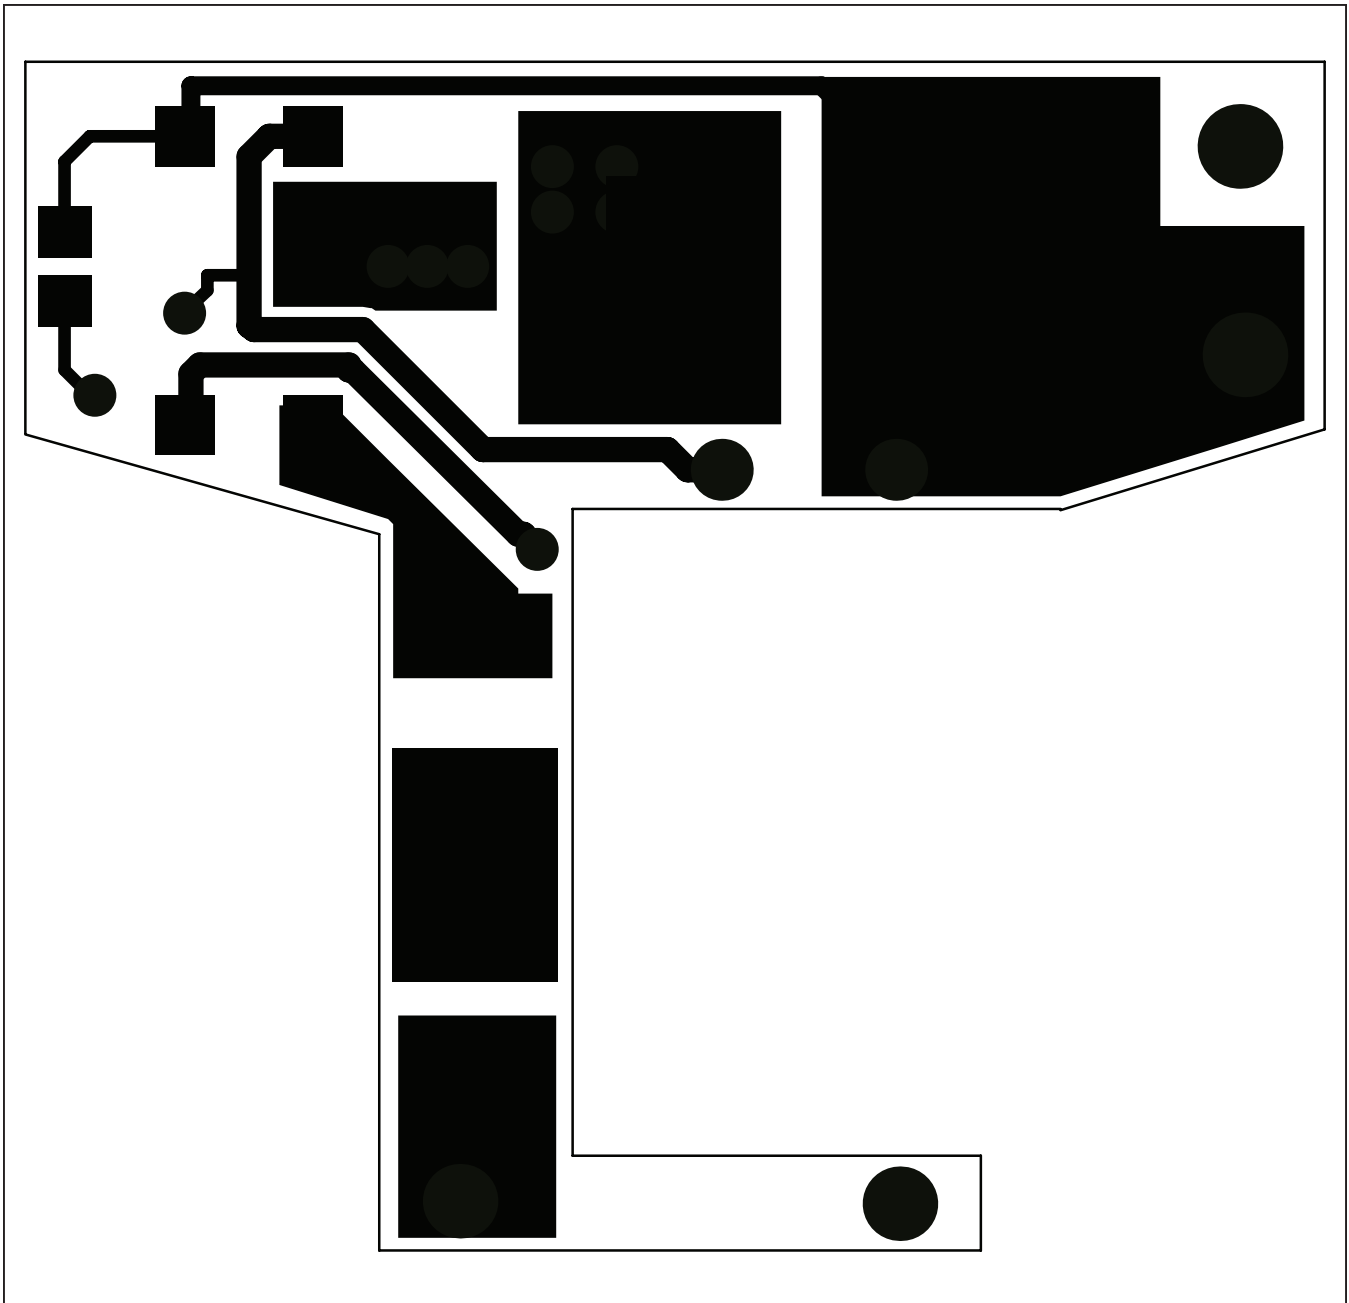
MAX16840L EV Kit PCB Layout—Solder Side
